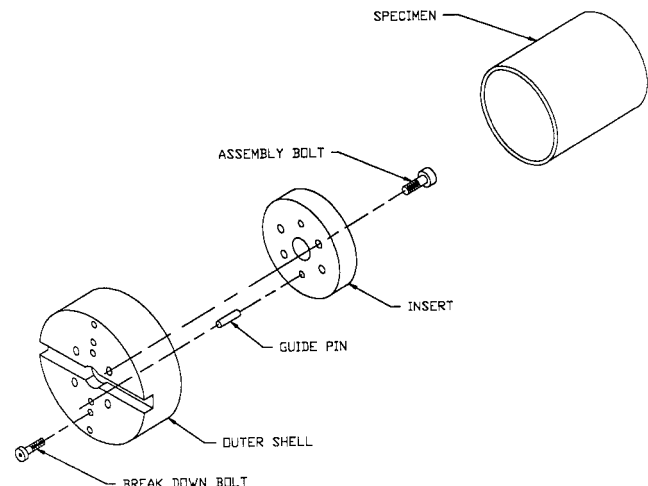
Assembly Drawing for the Compression Fixture and Specimen
